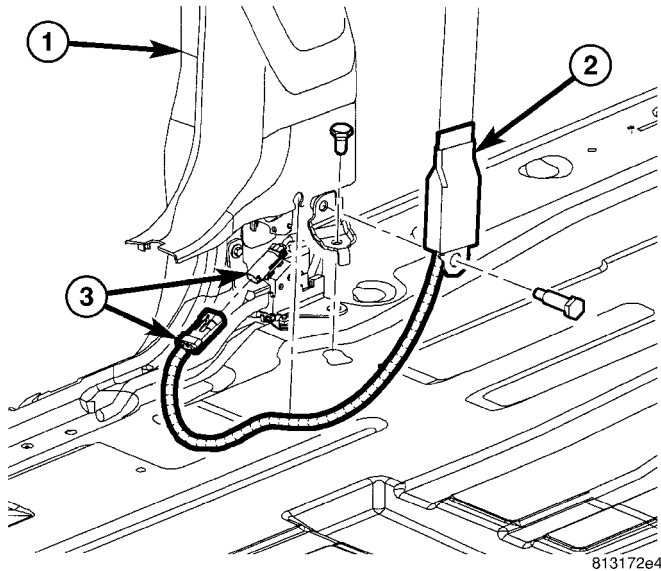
BELT TENSION SENSOR/LOWER SEAT BELT ANCHOR
